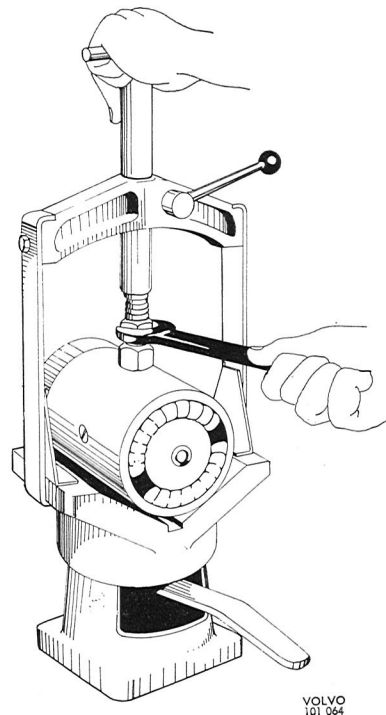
Rotating clamping block for removal and installation of field coils
